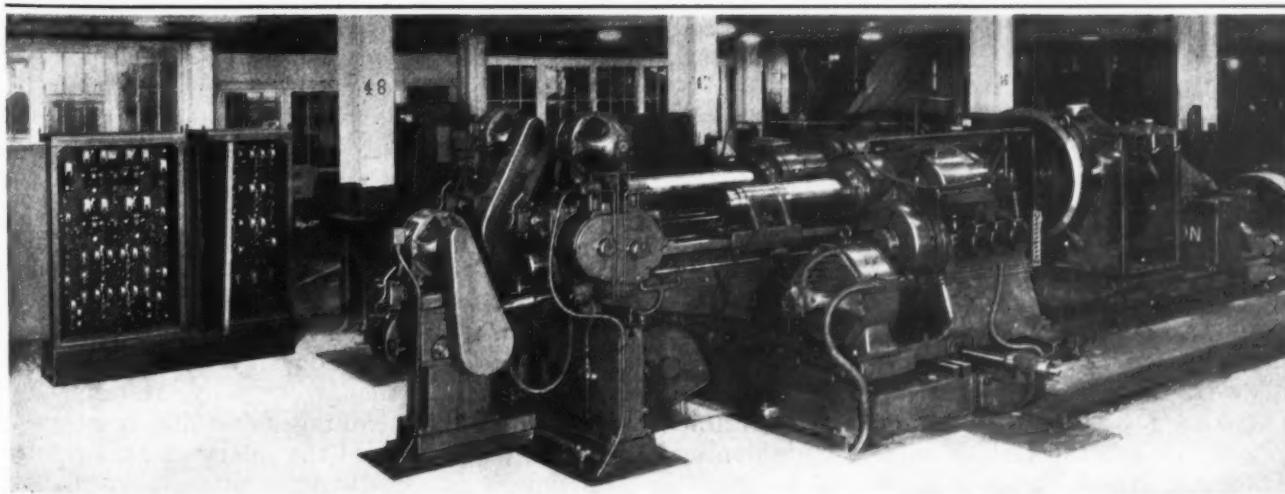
Sellers Planer Type Milling Machine with Four Milling Heads Equipped with Individual Motor Drive, and Duplicate Pendant Type Push-button Controls
